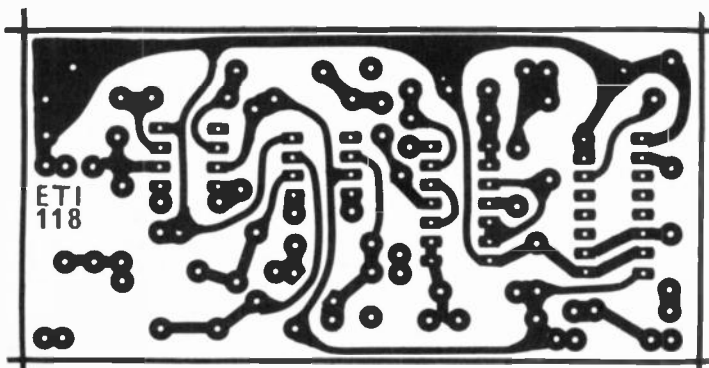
Printed circuit board for the counter. Full size 90 x 45 mm.
